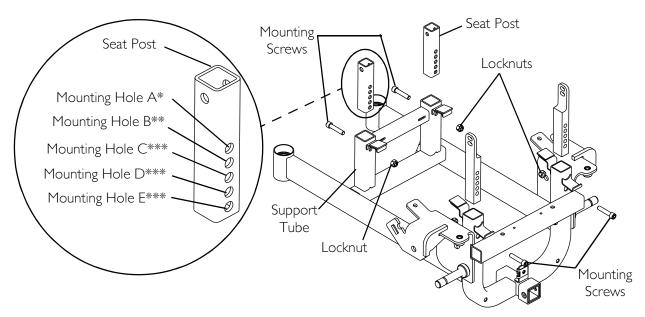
Adjusting the Seat Height - M91 Wheelchairs
